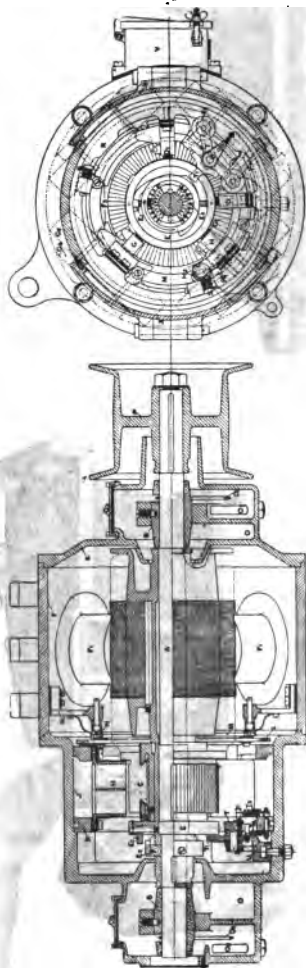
Sections Showing all Parts of a Series 6 Machine
